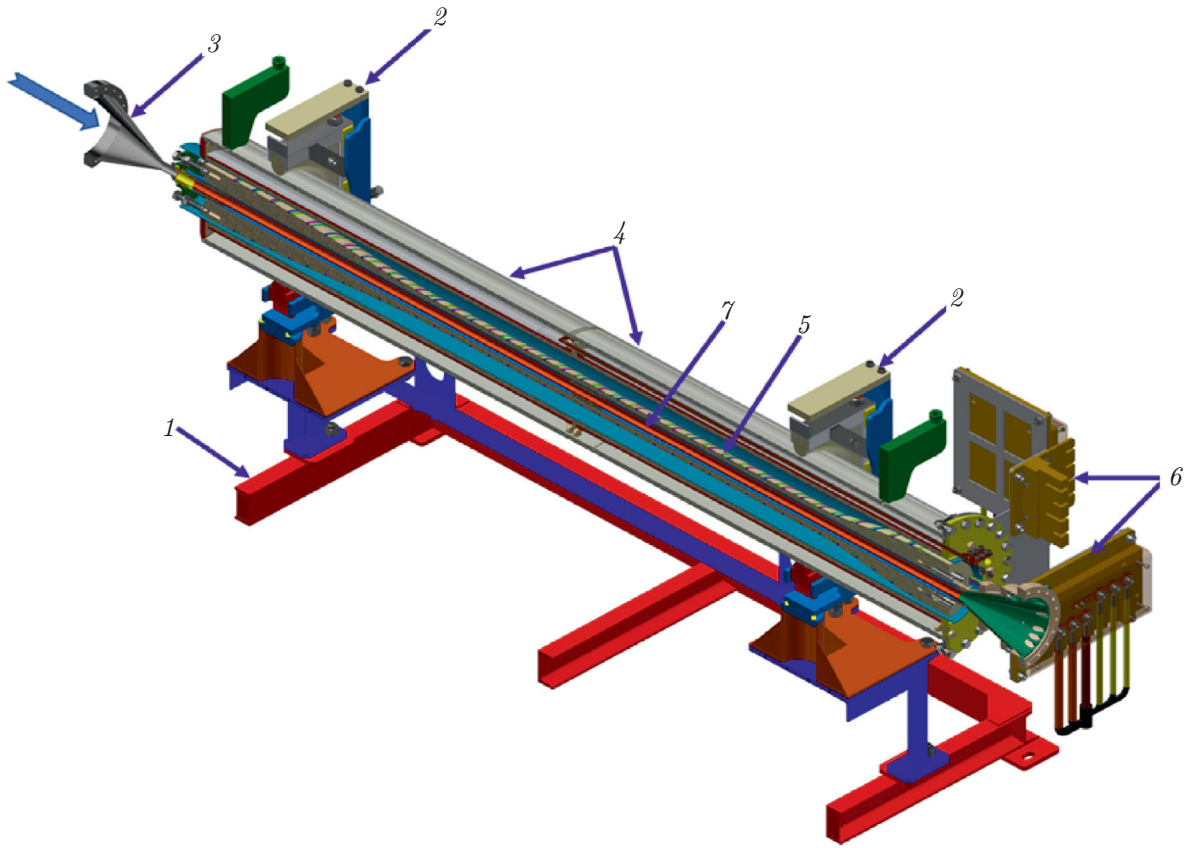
Sectional view of a FEL section: supporting fixture 1, system for FEL section positioning 2, input section of the vacuum FEL chamber 3, solenoid of the magnetic system, which consists of two sections installed in a magnetic cylindrical shield 4, 5 helical undulator 5, platforms for installation of current guides from power sources 6, and electrodynamic system of the FEL 7. The arrow on the left shows the electron beam conditionally.
